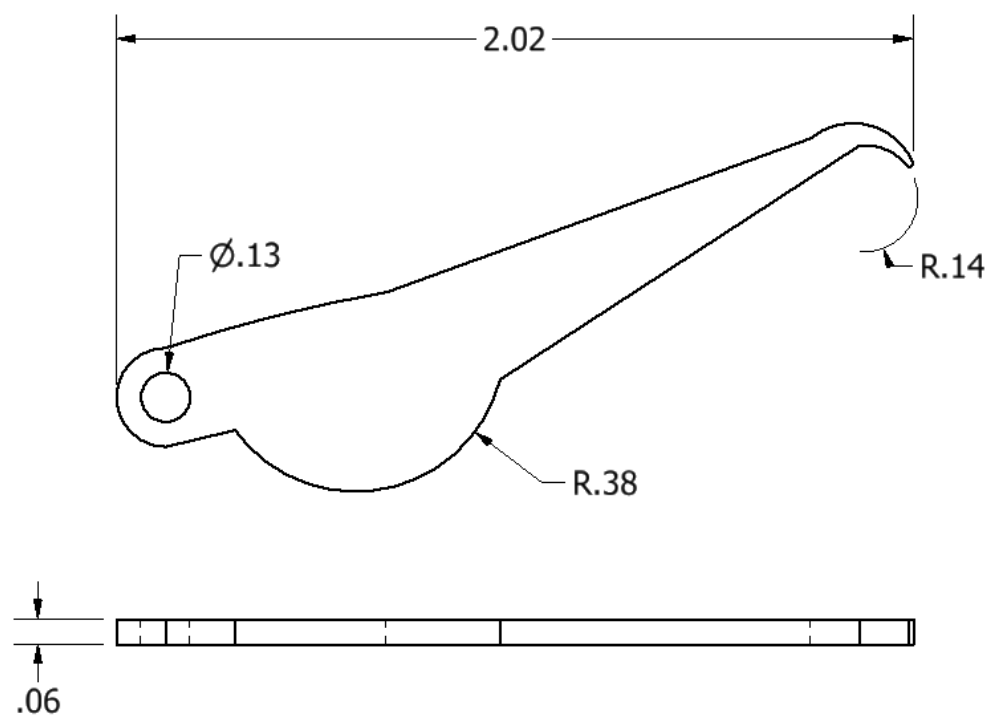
Short gripper for Mark 2 grabber. Dimensions in inches.
